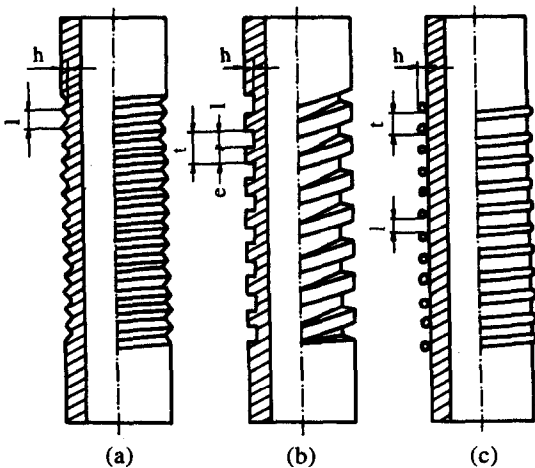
Studied tubes; (a) triangular threading; (b) ribbon ribbing; (c) helical wiring.
